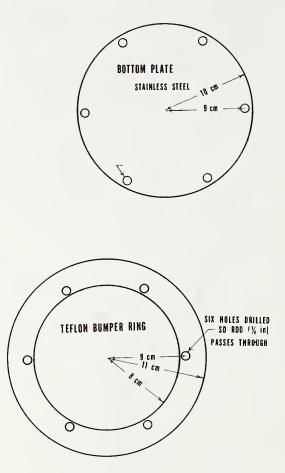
Stainless steel drop sampler. Detailed views of bottom plate and Teflon bumper ring.
